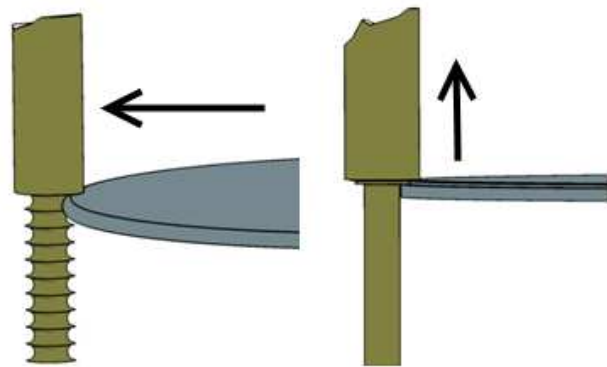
Diagram of radial – left and axial – right machining with typical geometrical defects caused by tool electrode wear.
